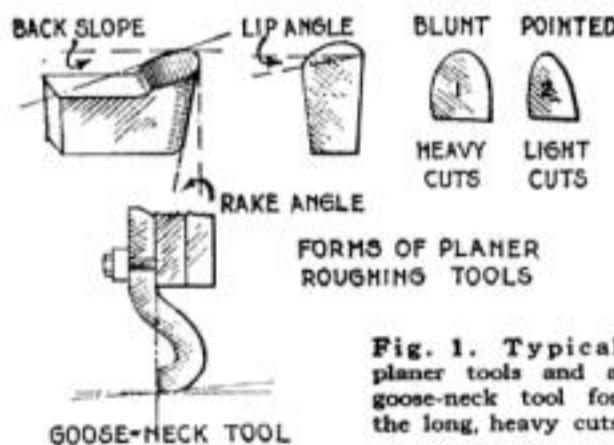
Typical planer tools and a goose-neck tool for the long, heavy cuts
